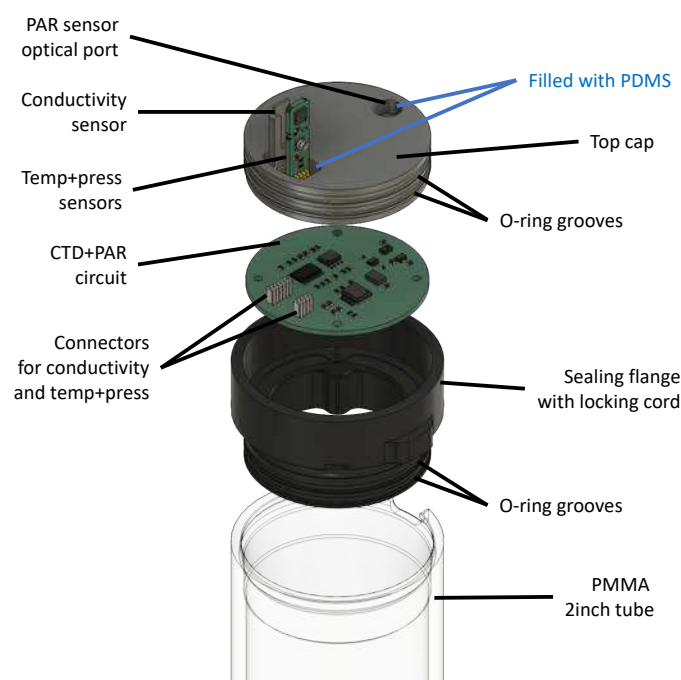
Exploded view describing the assembly of the CTD+PAR sensor for marinization with a Blue Robotics compatible design.
